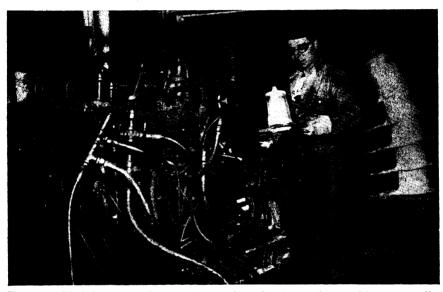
If oil is used as the actuating medium for the casting machine, core pulls, and ejector mechanism, leakage through the connections or when dismounting the die may create a fire hazard.
